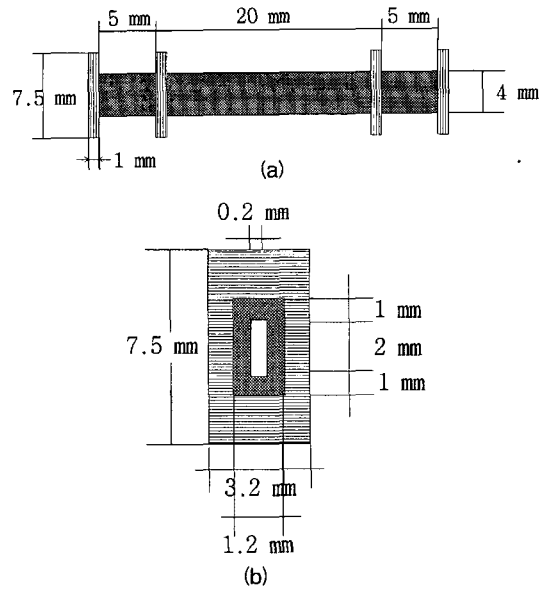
Shape of sensor coil former (a) Front view (b) Side view.
